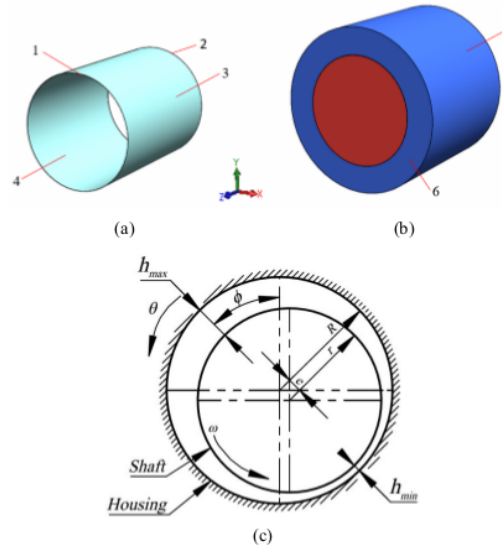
Configuration of lubricated journal bearing: (a) Fluid domain (lubricant film); (b) solid domain (bearing and shaft); (c) front view of bearing-shaft (1. Pressure inlet, 2. Pressure outlet, 3. Bearing interface, 4. Shaft interface, 5. Outside of housing, 6. Wall of housing. Note: h_{max} is maximum film thickness; h_{min} is minimum film thickness; e is eccentric distance; r is shaft radius; R is inner radius of the bearing; θ is circumferential angle from the maximum film thickness; ϕ is attitude angle; ω is angular velocity).
